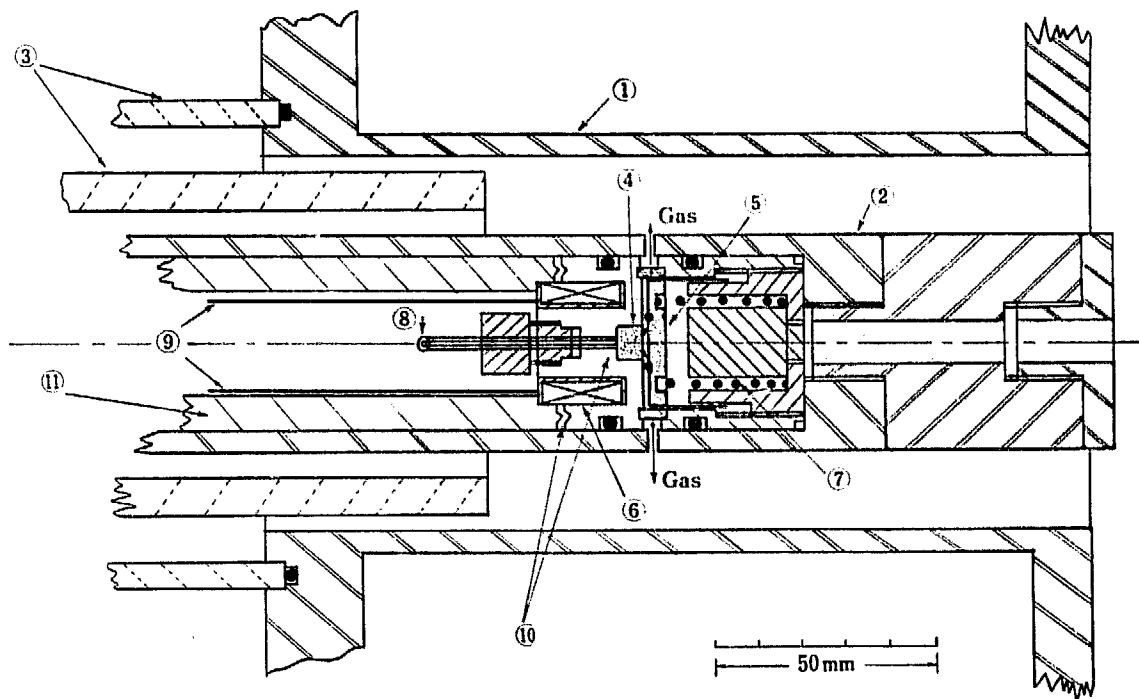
Cross-sectional view of the electromagnetic fast acting gas valve
